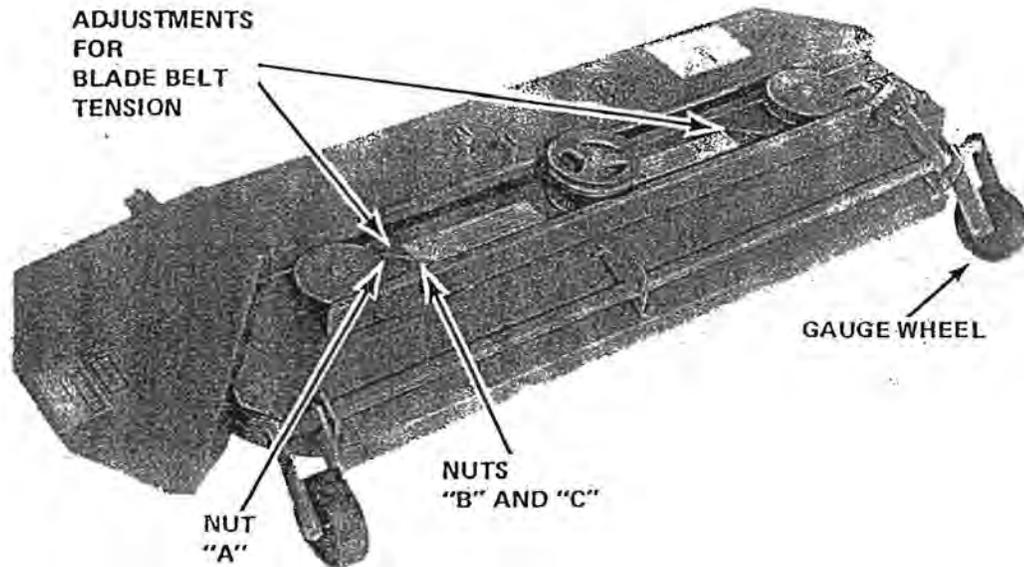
Mower Shown with Blade Belt Guards Removed
